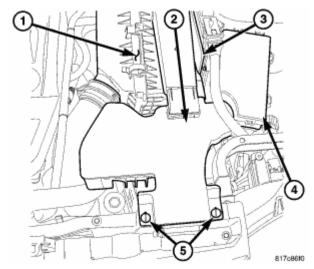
AIR CLEANER INLET Courtesy of CHRYSLER LLC
